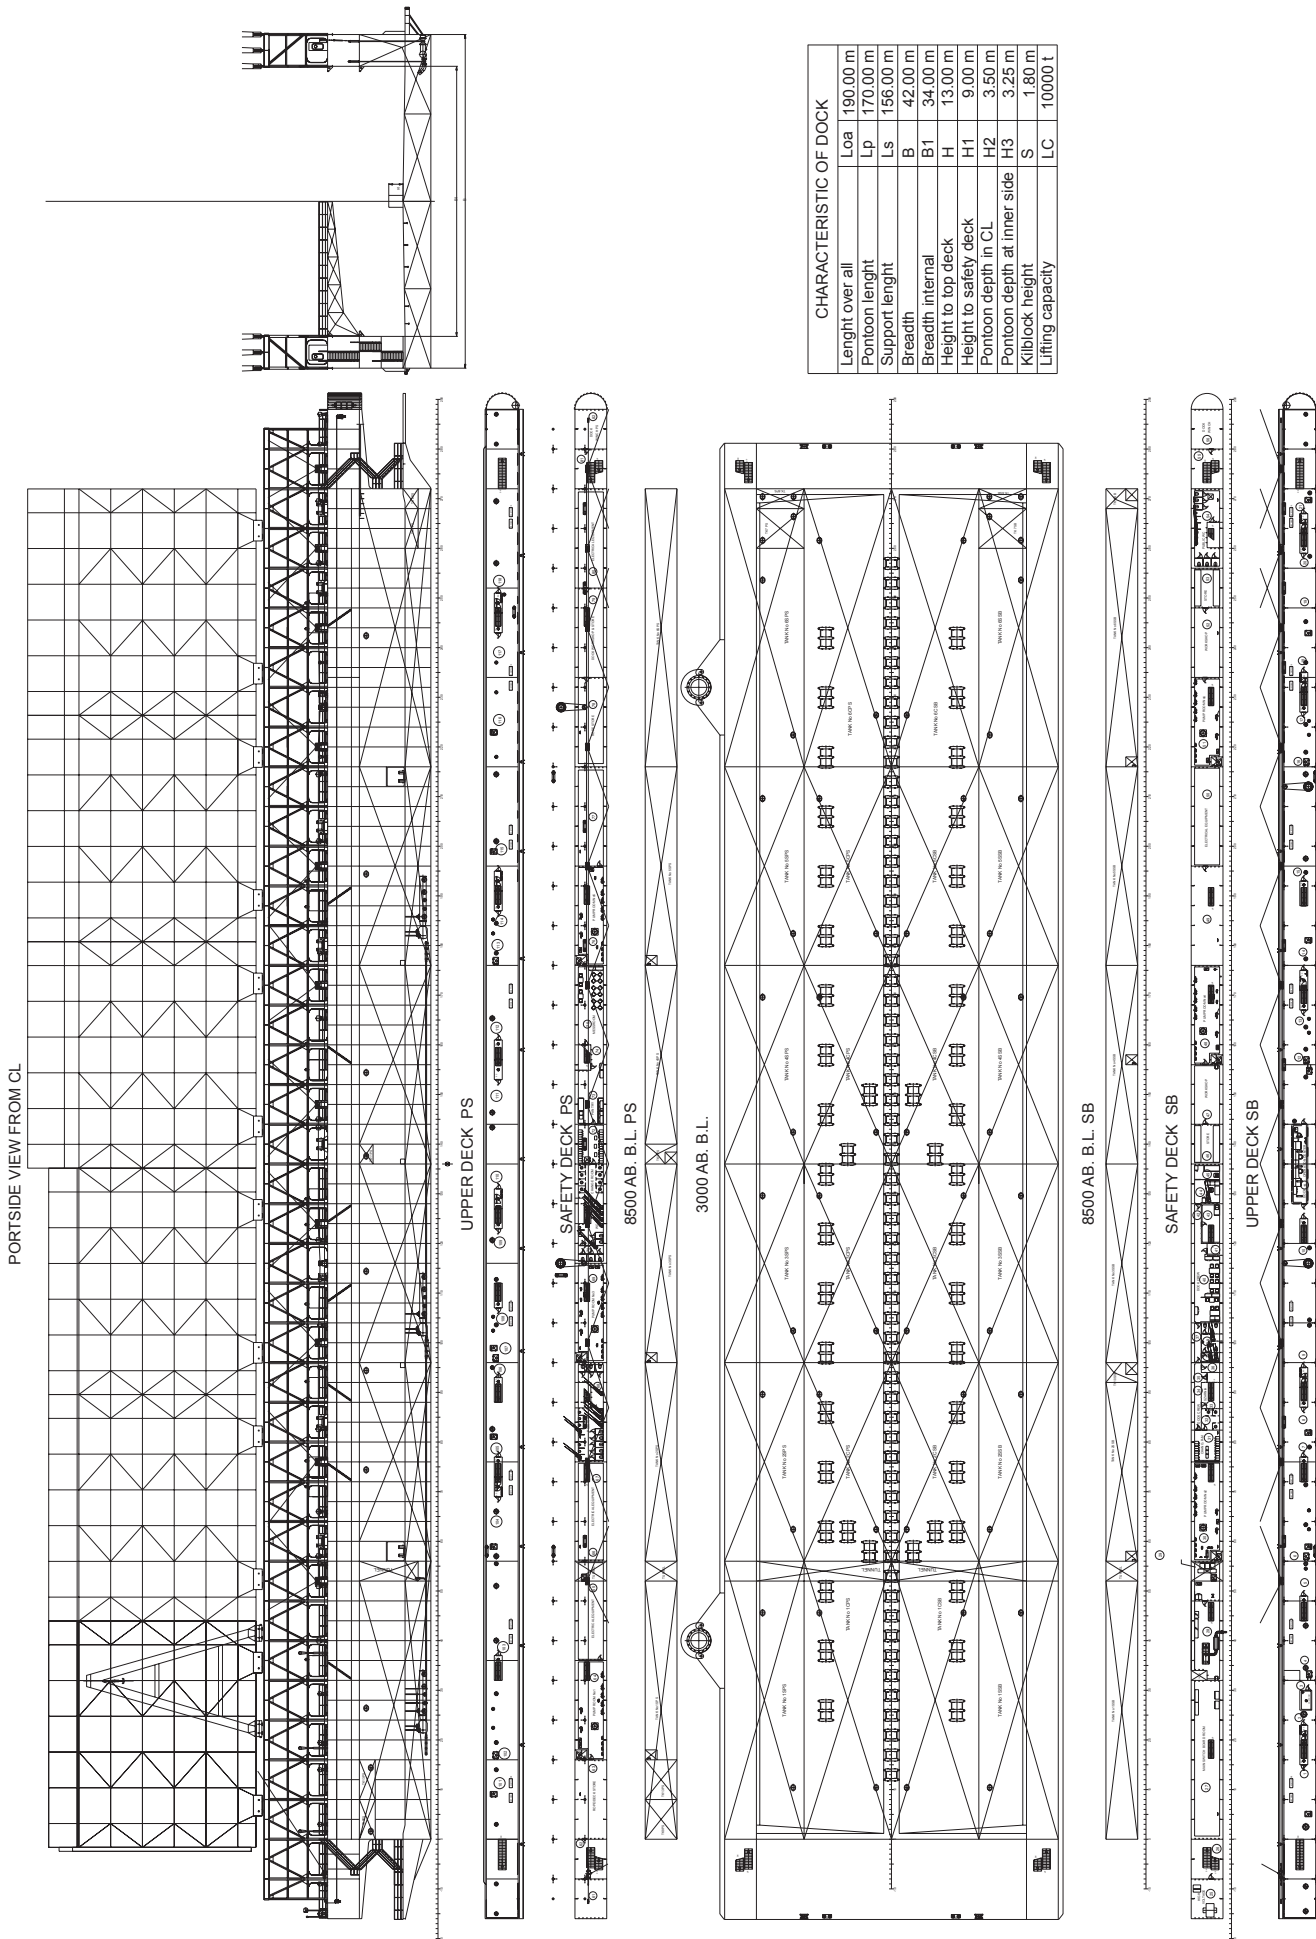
Simplified general arrangement plan of the SINE 212CD dock.
